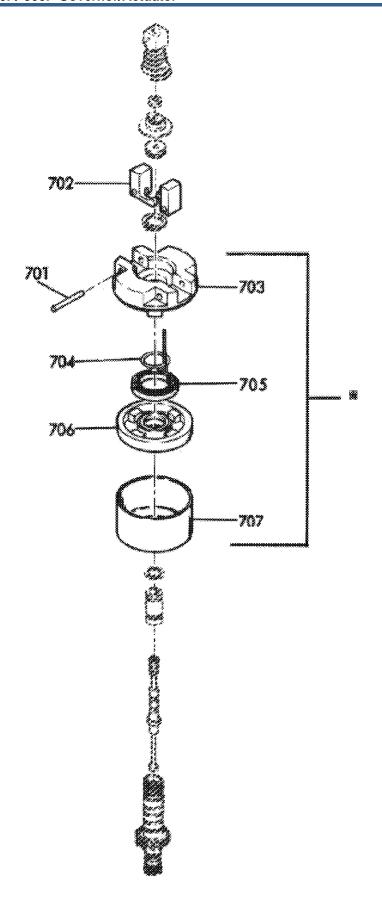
Parts for the EGB-200P Governor/Actuator
